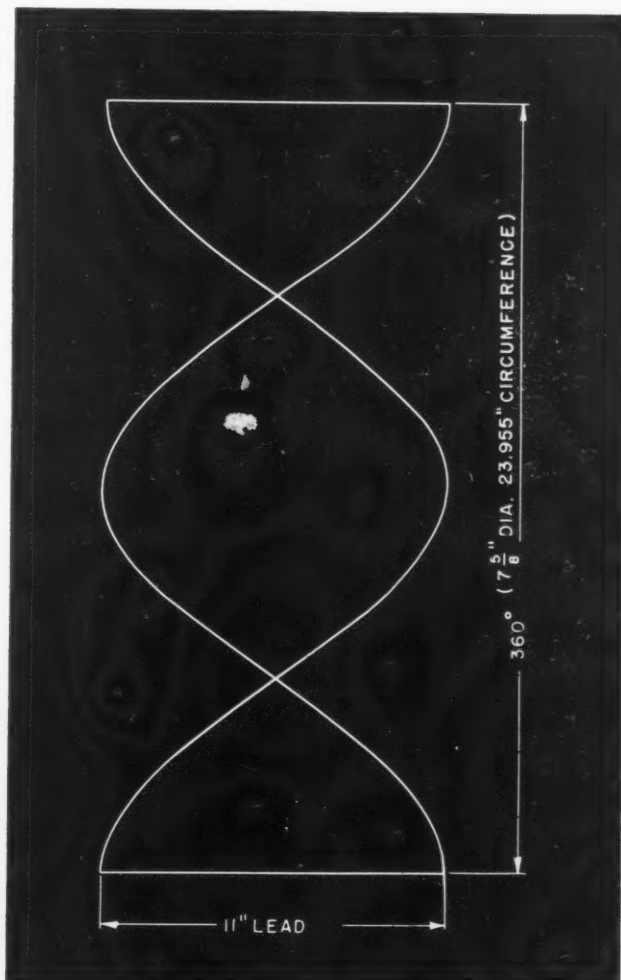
Development of a double endless oil-groove having a lead of 11 inches, which is cut in the bore of a bushing $7 \frac{5}{8}$ inches in diameter
